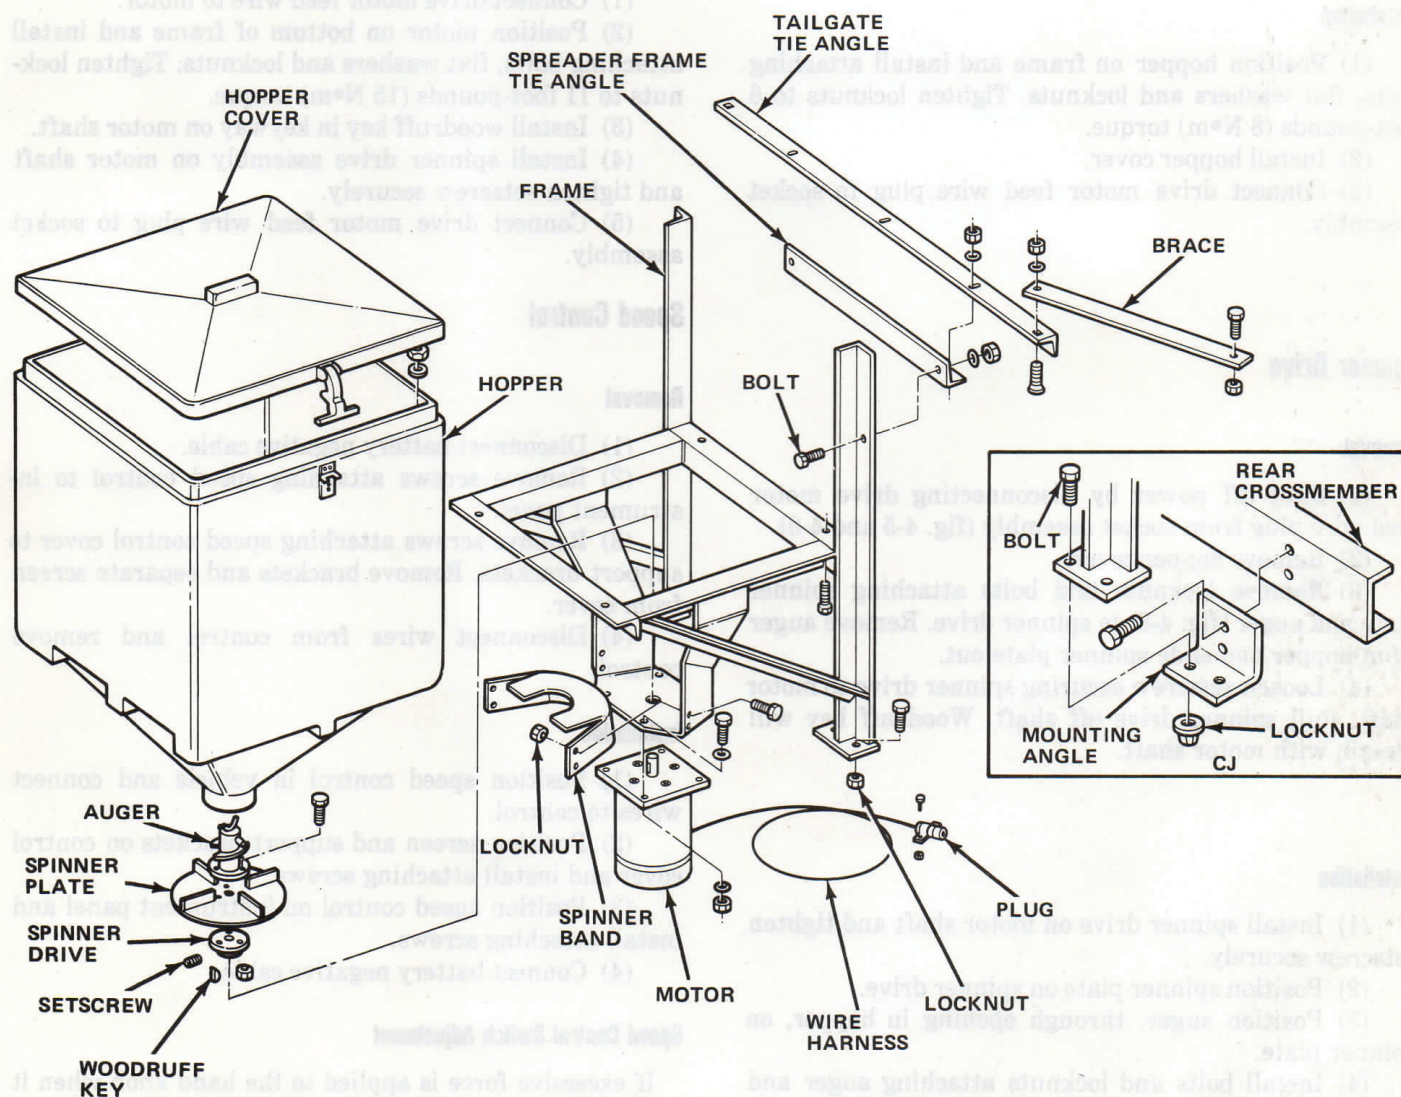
Mini-Spreader Assembly Components and Hardware
